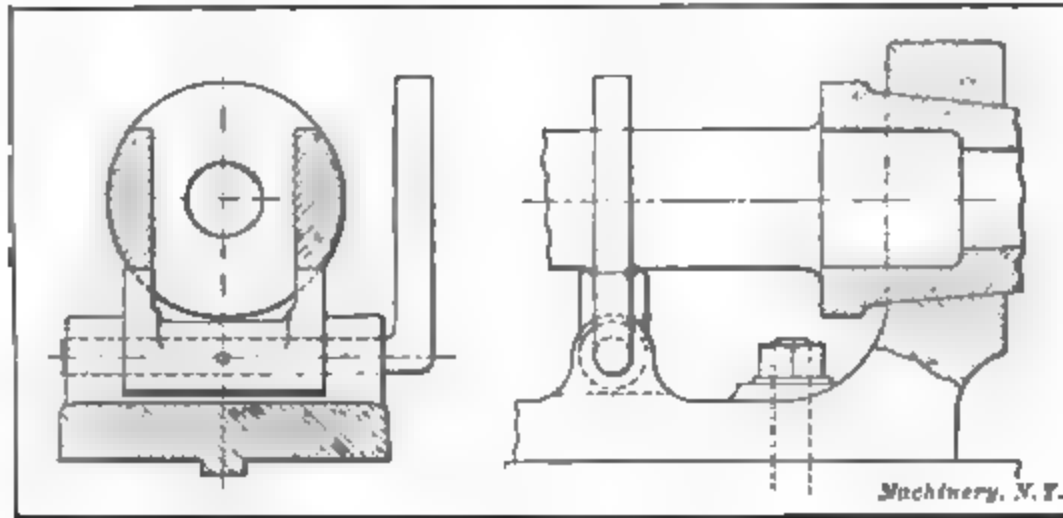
Lock for Open Spindle of John Lang & Sons Turret Lathe
